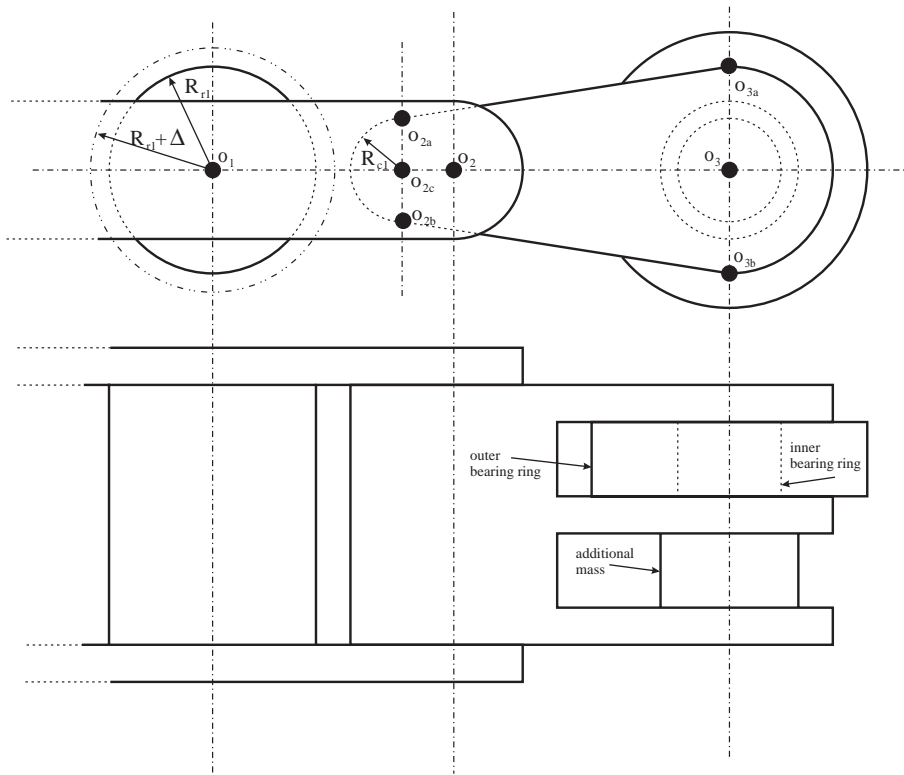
Front and top view of the assembled rotor, coupler and rolling body.
